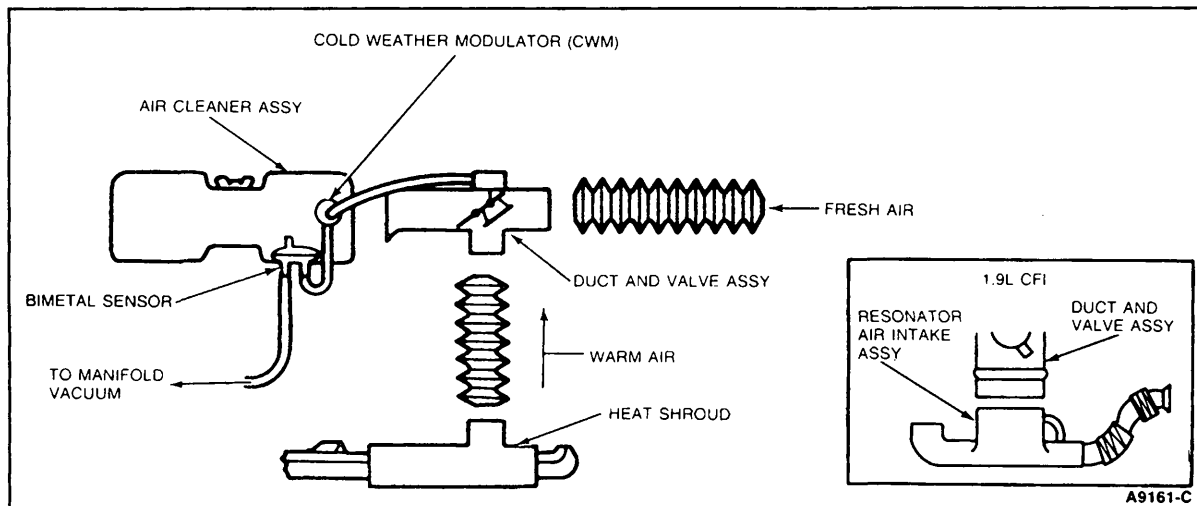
Typical Air Cleaner and Duct System, Carburetor and Throttle Body Applications — 1.9L, CFI, 5.8L (Passenger Car)
